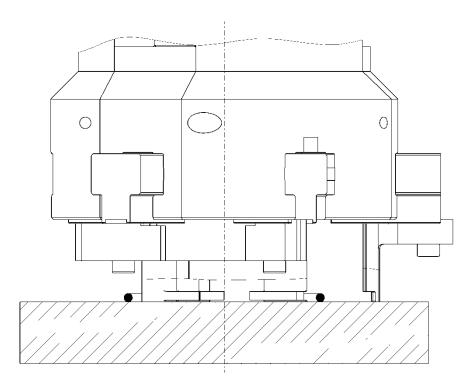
Internal assembly IM\_1.3 Figure with transfer point
